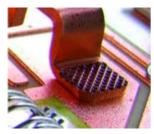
Copper terminal joint to DCB circuit by ultrasonic welding
